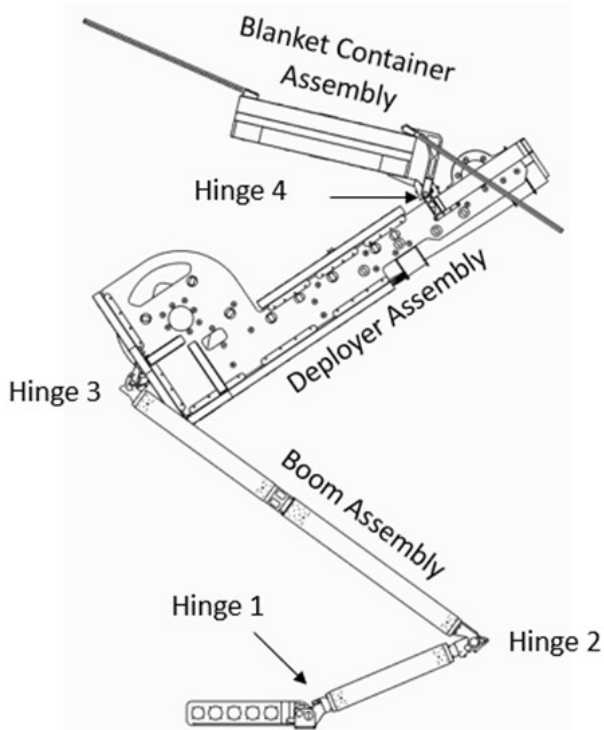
First Stage Deployment: Four Hinge Lines Deploy Boom Assembly, Deployer Assembly, and Blanket Container Assembly
